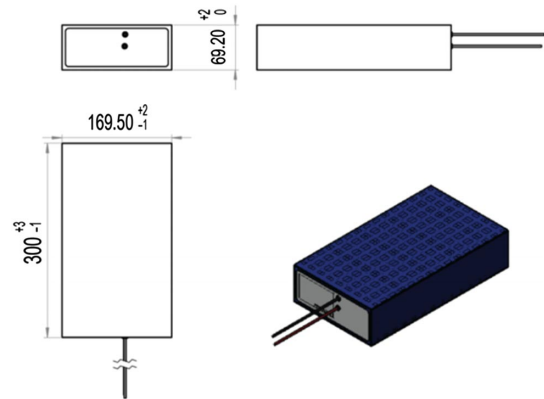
Assembly drawing of a package unit of 18650-type lithium-ion battery.
